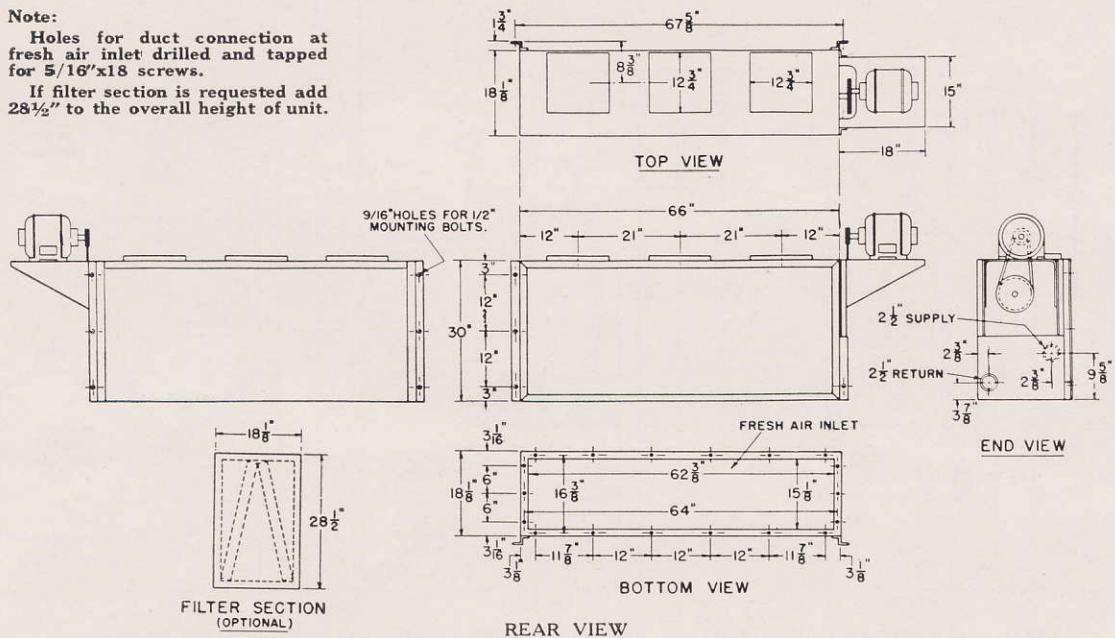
No. 1866 Type "R" Unit Heater. Wall Mounting.
